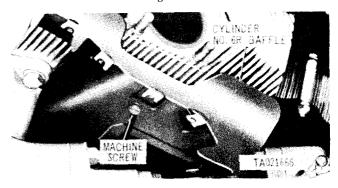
Disconnecting or connecting lower right engine shroud.
